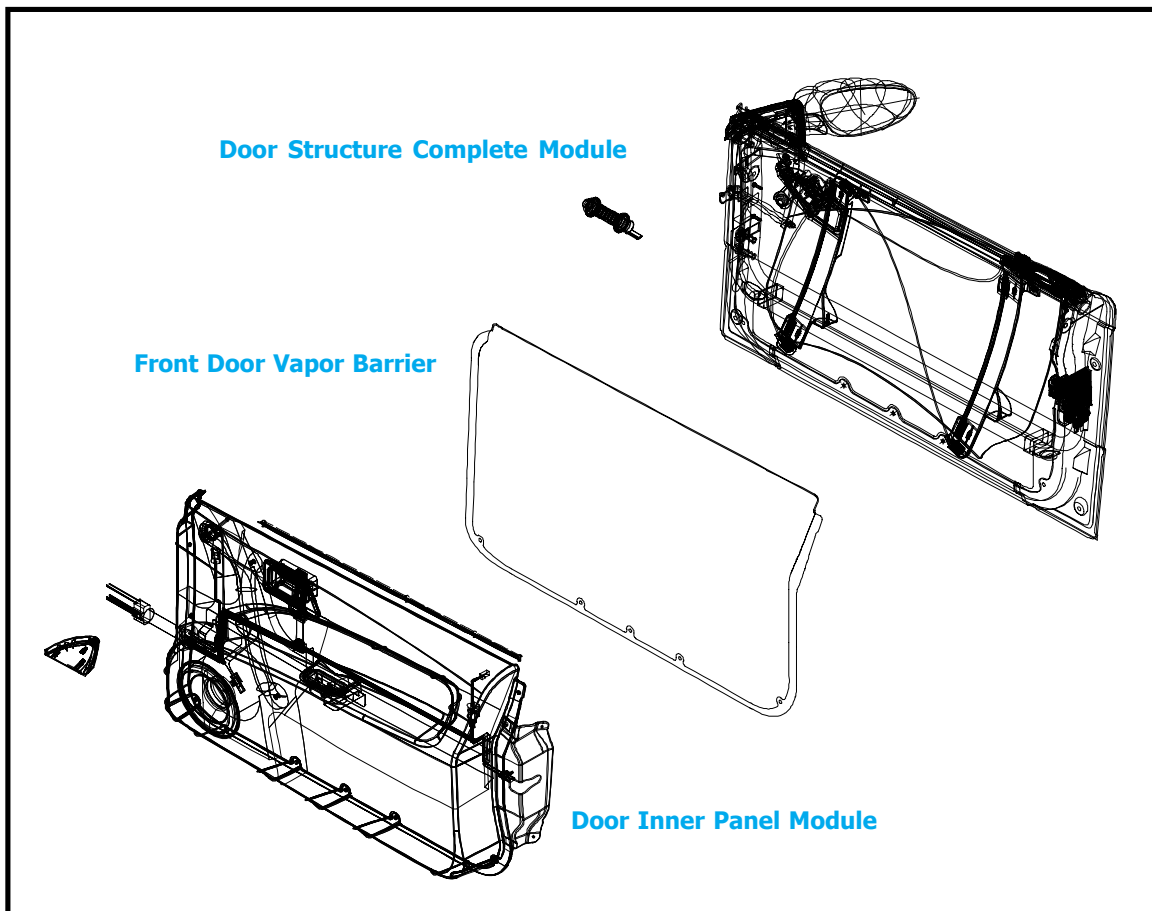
Subassembly - Door structure & Vapor barrier & Trim Panel Module
